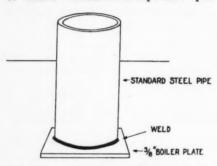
Carburizing Pot made from steel pipe welded to a base of boiler plate.
